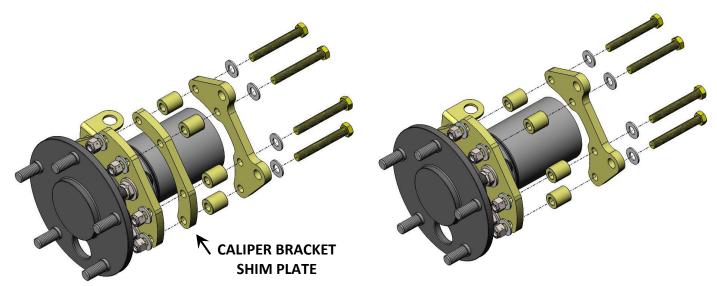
Caliper Mounting Bracket Installation (2.000" Standoff)
